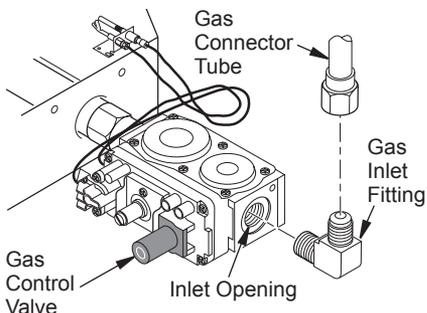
Installing Inlet Fitting and Gas Connector Tube (Valve Cover Removed for Clarity)
